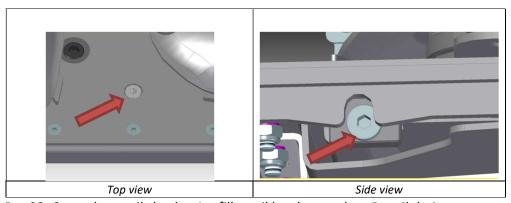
Gearbox oil inspection: A – filler, drain, dipstick B - cutter bar vent
